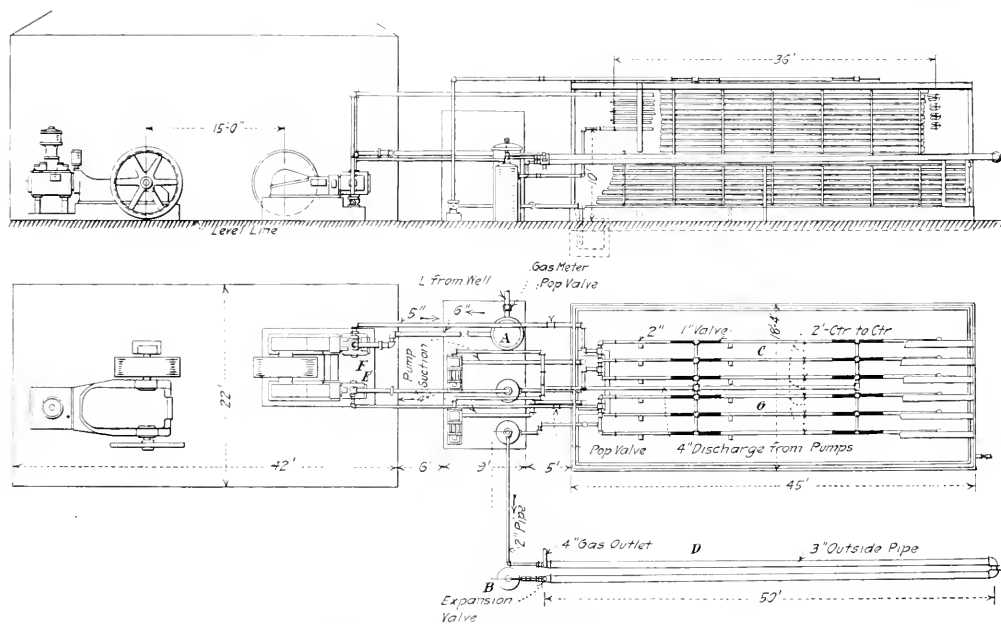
PLAN AND ELEVATION OF FEATHER VALVE COMPRESSOR
